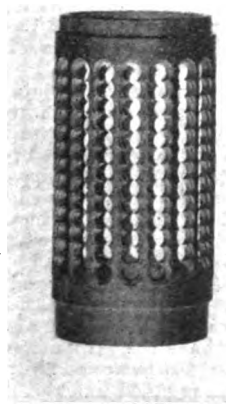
SHOWING AN EXAMPLE OF STEP DRILL WORK.
